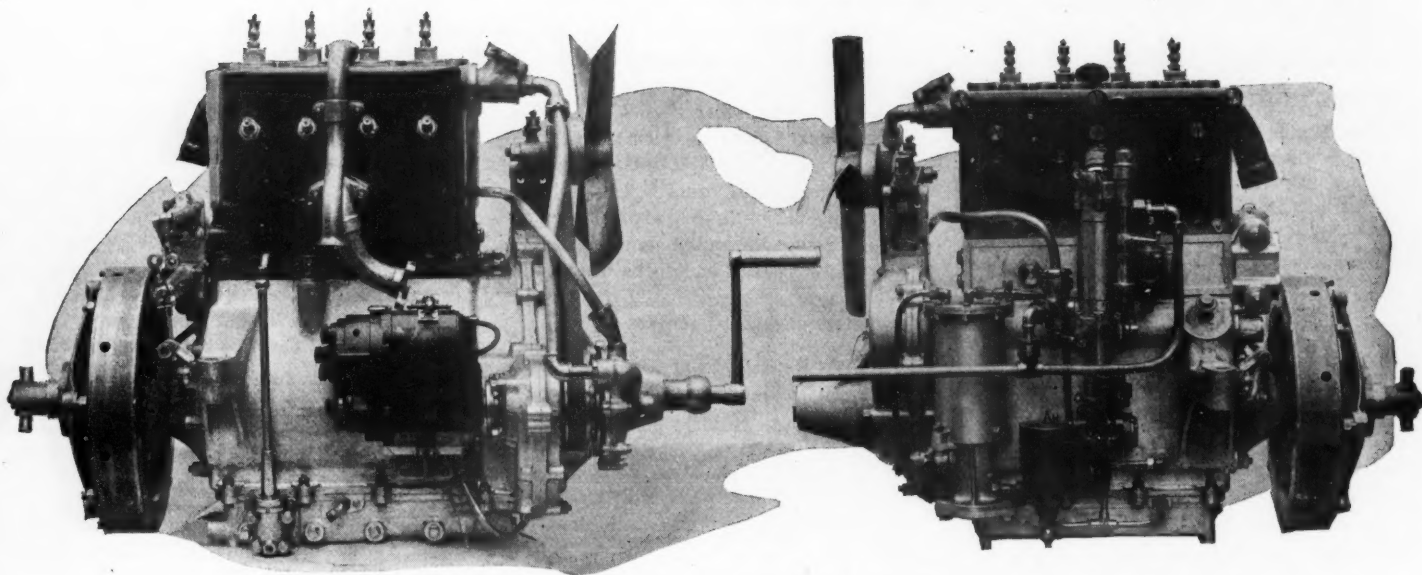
TWO VIEWS OF THE NEW ROCKEFELLER SLIDING-SLEEVE MOTOR
